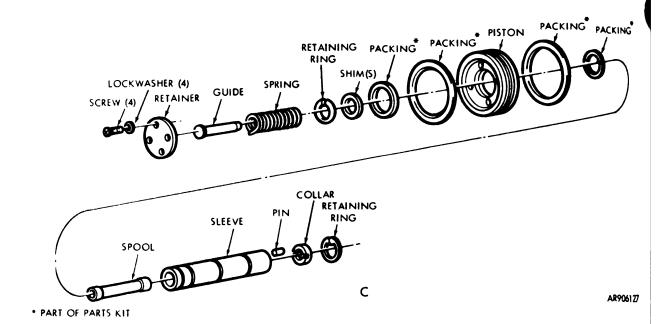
Superelevation actuator disassembly or assembly (2 of 2).
